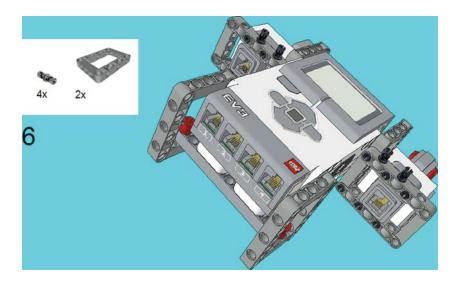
Insert two beam frames on the construction, and insert the connector pegs on as shown
